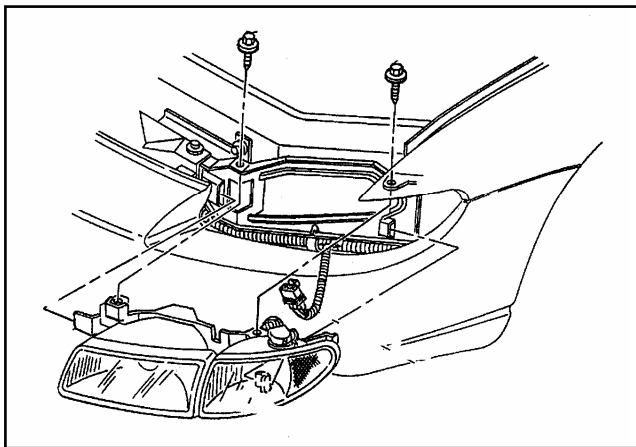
Old Intrigue Headlamp Mounting Design (2) Fasteners
